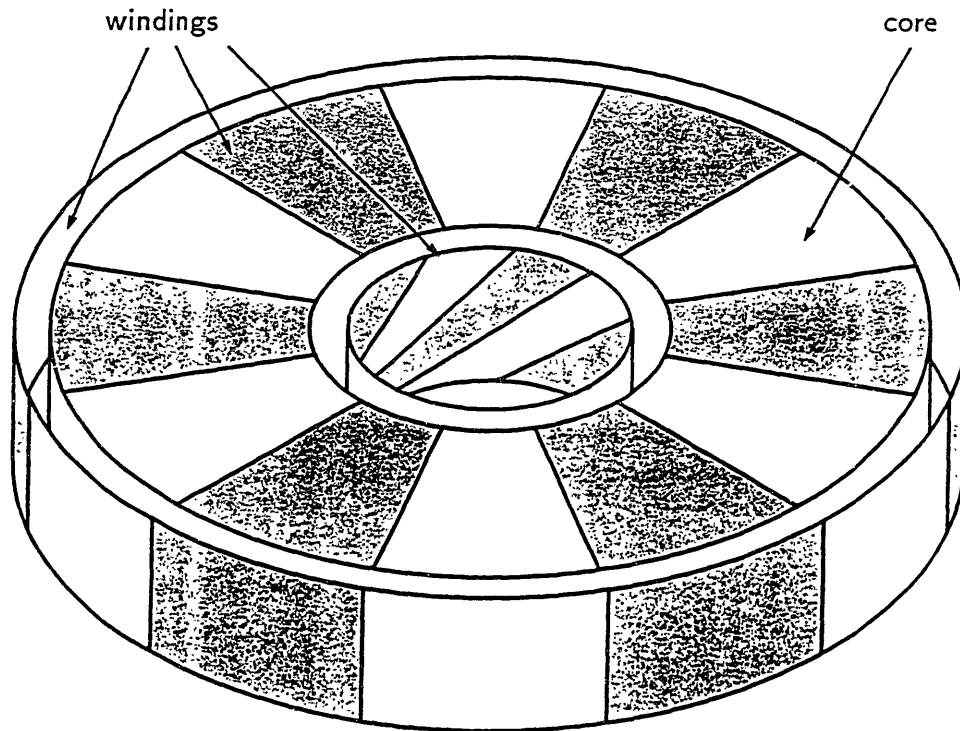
Toroid with thick film windings on top and bottom and flexible printed circuit board connections at inner and outer edge.
